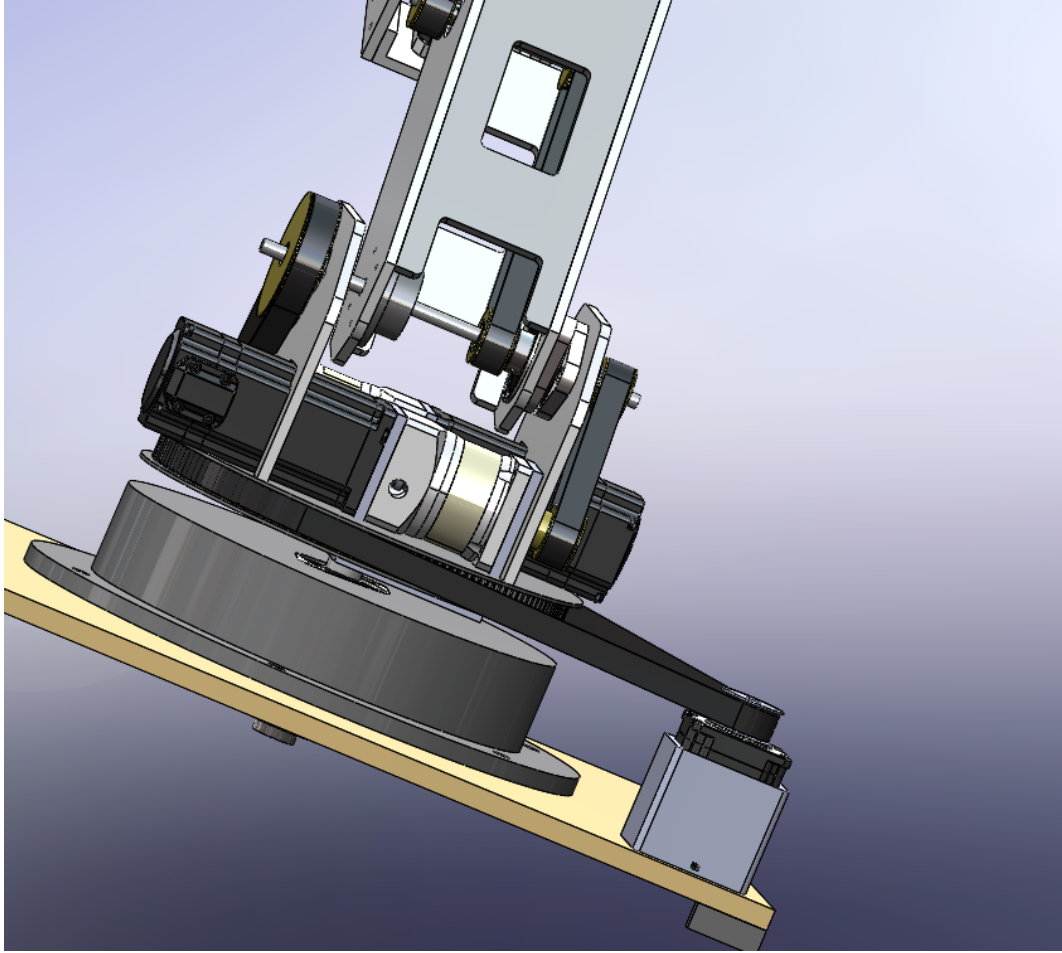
Close-up of the base and shoulder motor cluster, showing the paired NEMA motors either side of the shoulder pulley and the large slewing ring at the base rotation joint.
